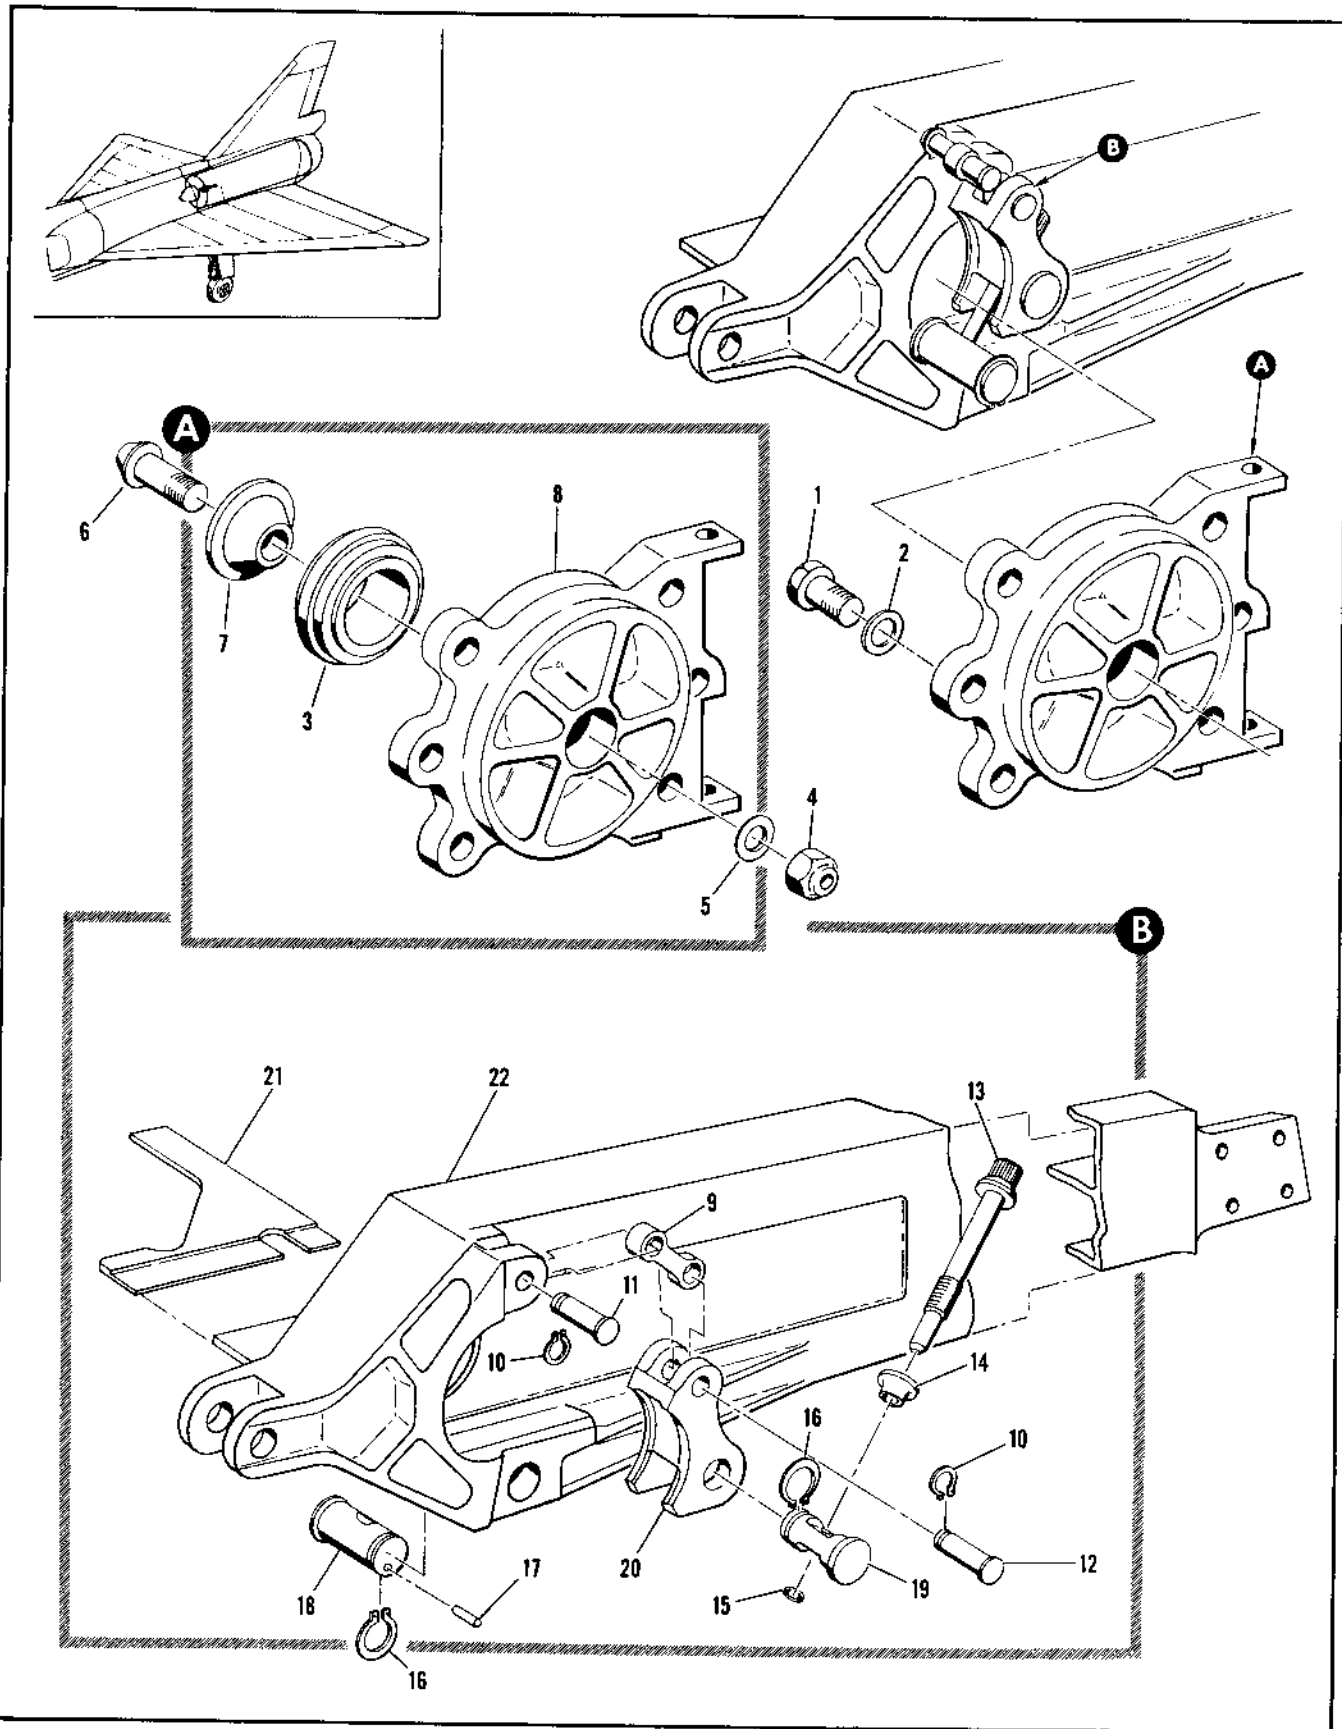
Engine Thrust Bearing Support and Clamp
